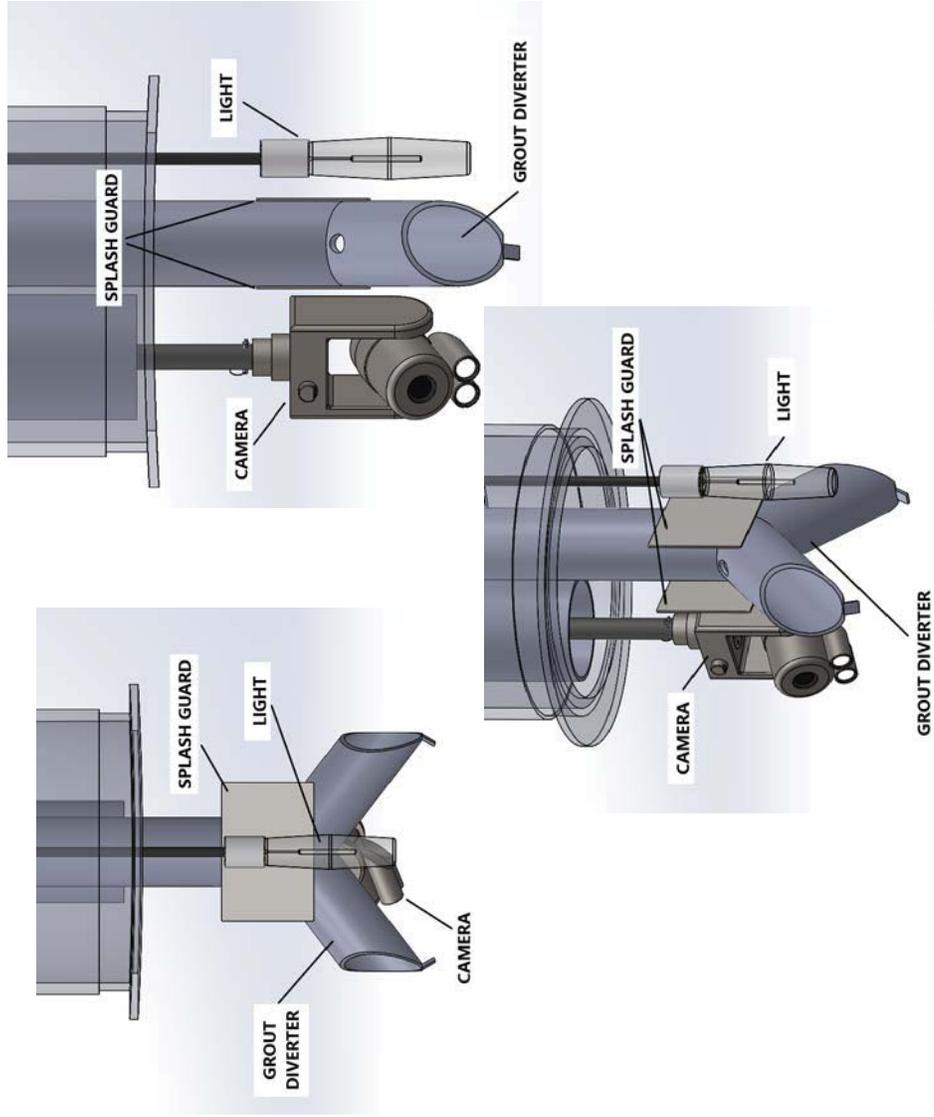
Plug Replacement for Existing Riser in Tunnel Number 2 (Isometric and Plan Views)
